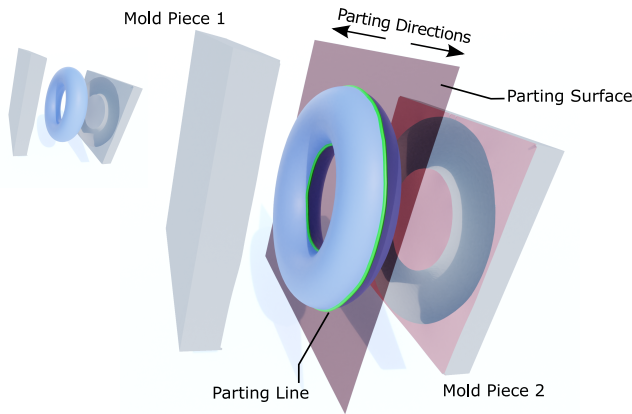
A simple example illustrating the main concepts and terms that describe a casting mold.
